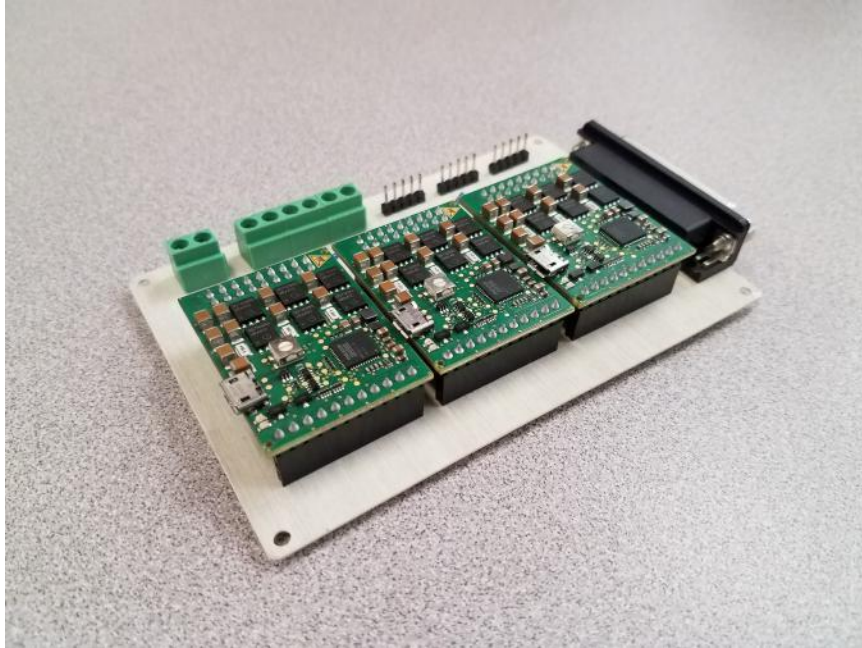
Fabricated Motor Driver Carrier Board Top Side
